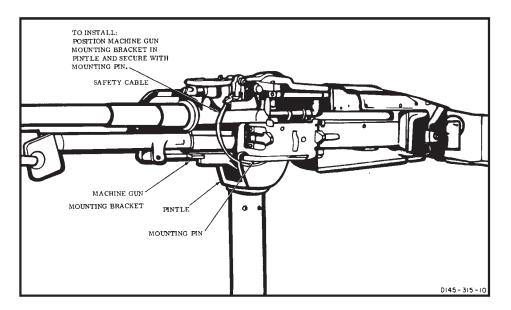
Machine Gun Positioned on Pintle — Left Side Shown
